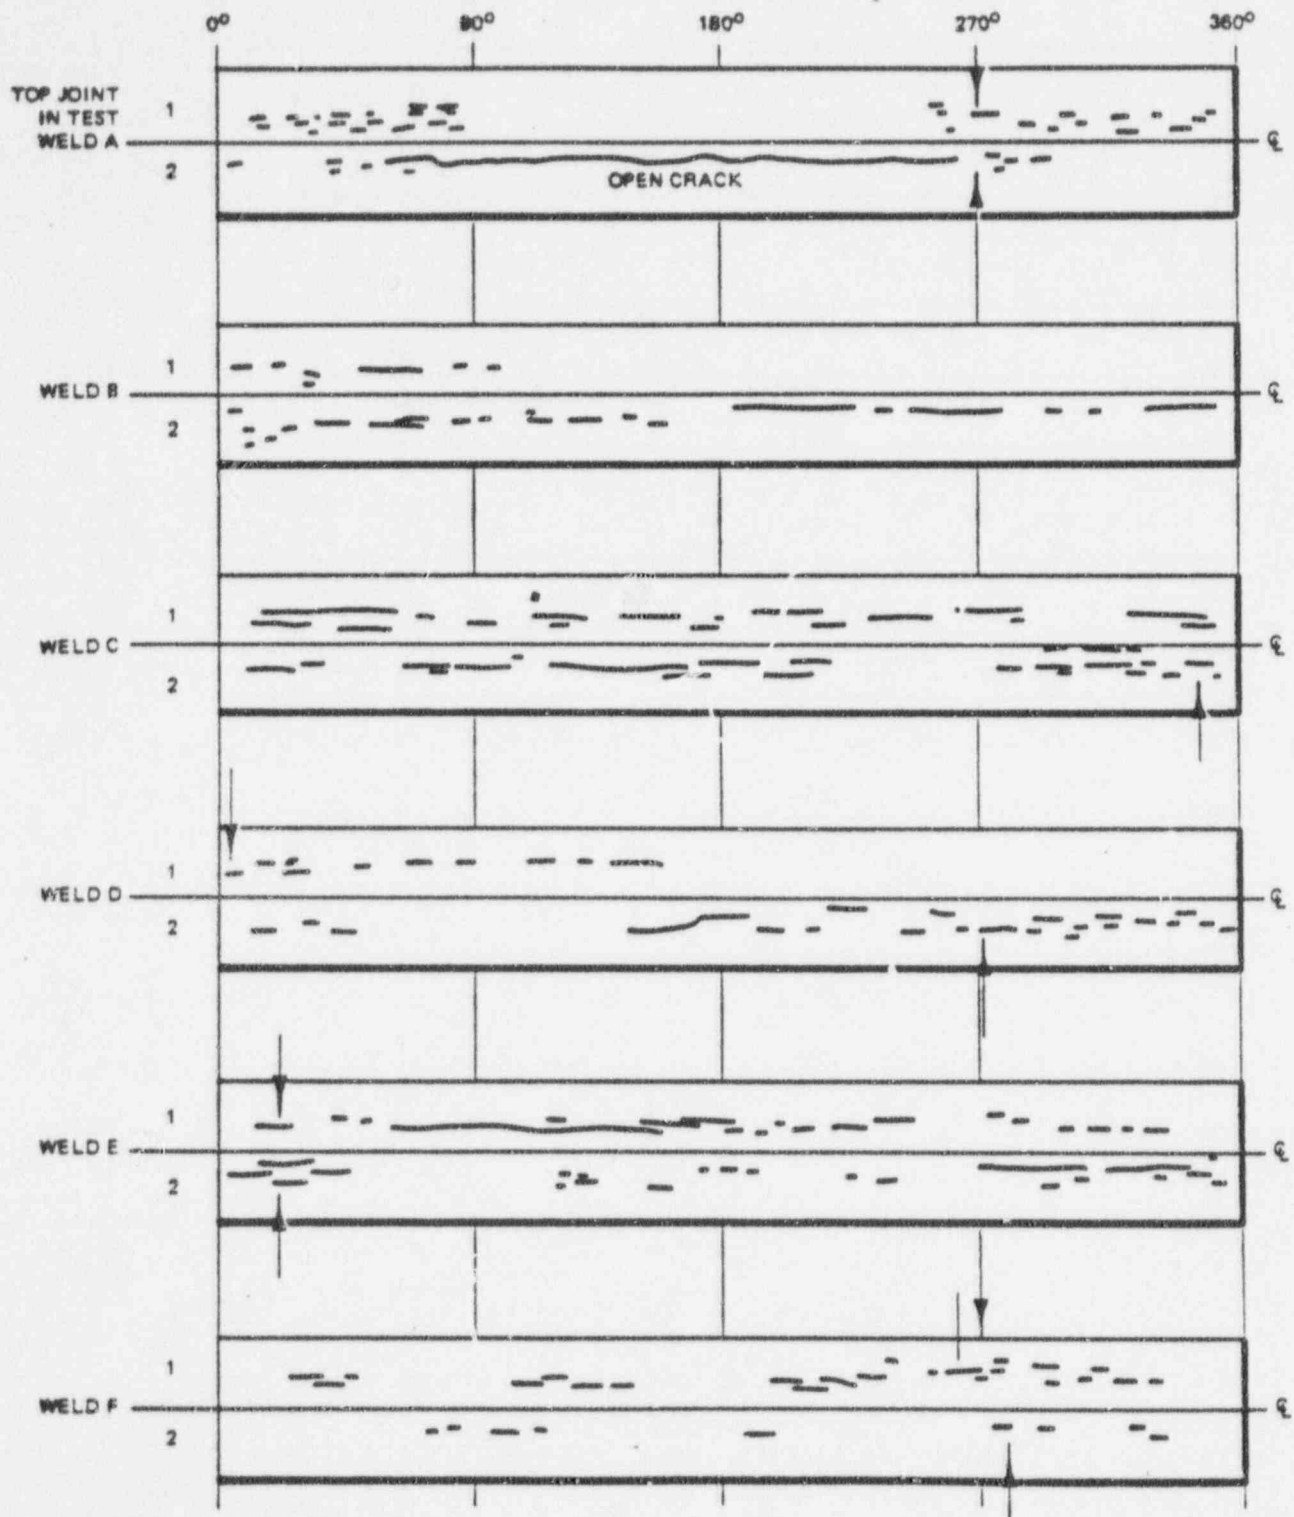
Dye Penetrant Test Results (Lay-Out of Weld Joint I.D. Surfaces)
